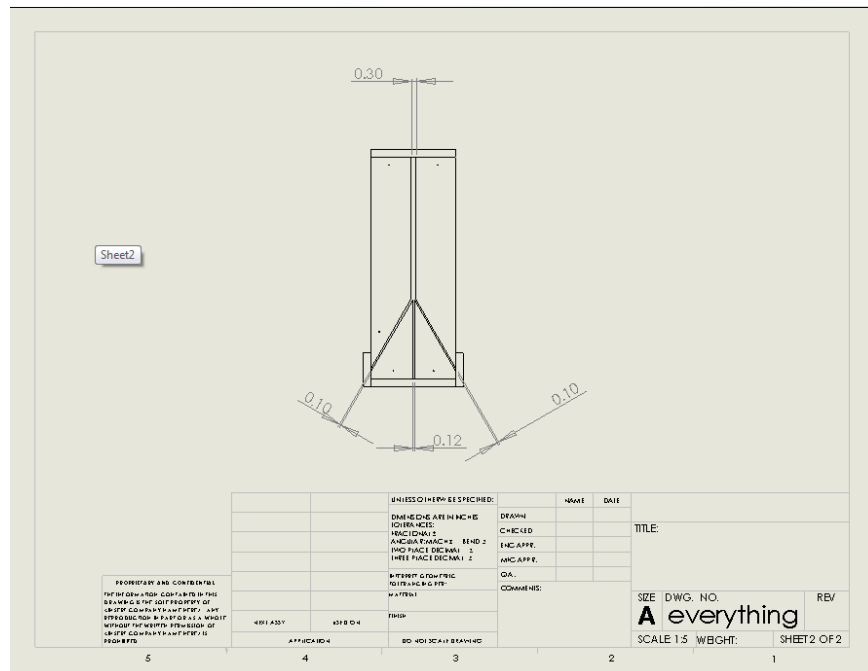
Technical drawing of the filtration block generated using Solidworks that shows the trough dimensions.
